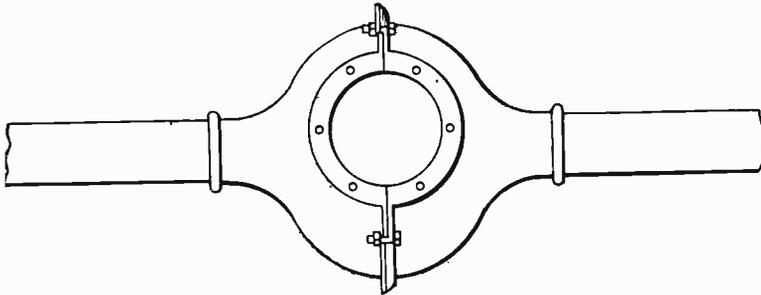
Automobile Forging Made of Separate Parts Electrically Welded Together.
